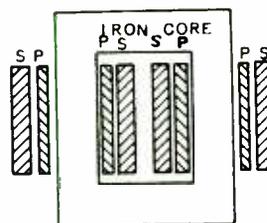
Cross-sectional view of transformer, showing iron core and primary and secondary windings.
